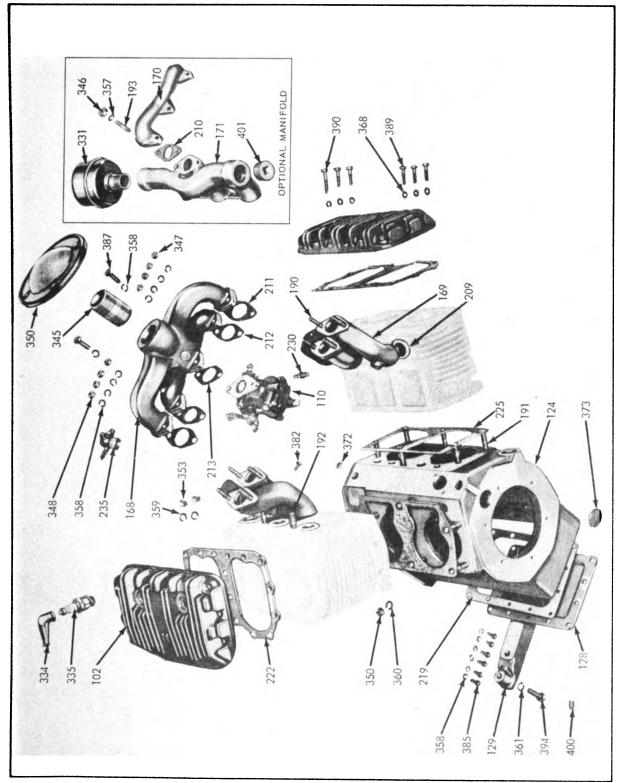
, MANIFOLD AND CRANKCASE GROUP
